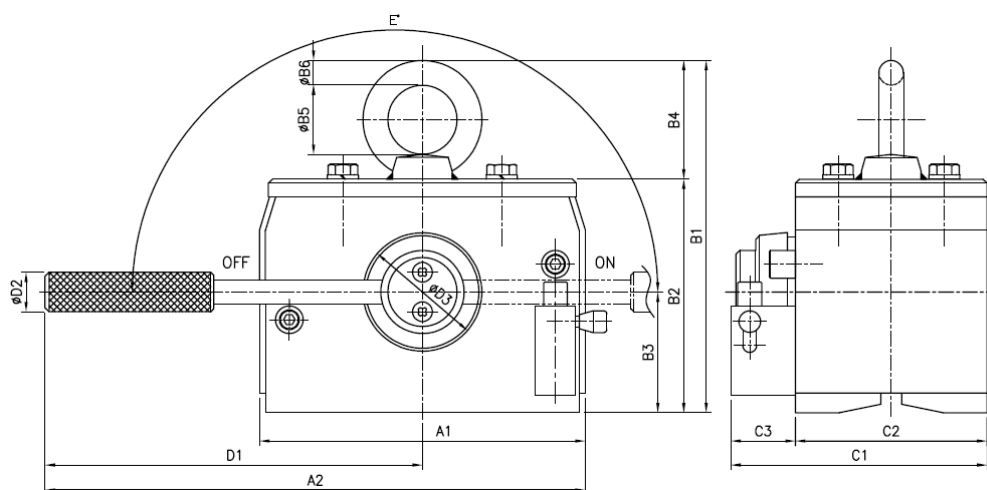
Outline drawing of KRD30, KRD50, KRD80, KRD100, KRD160
